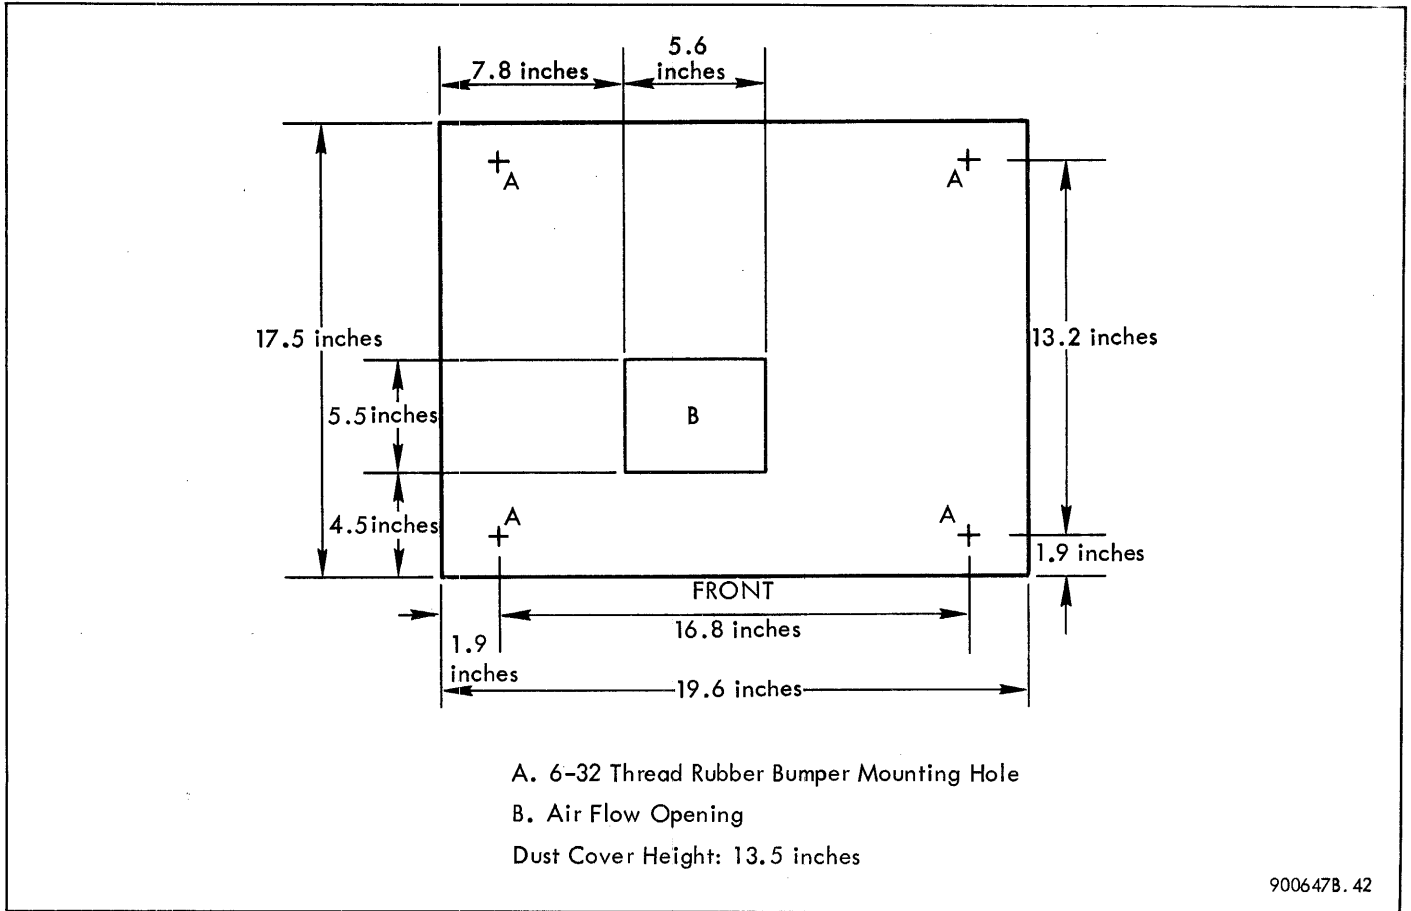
Model 9402 Dust Cover Housing Dimensions (Top View)
